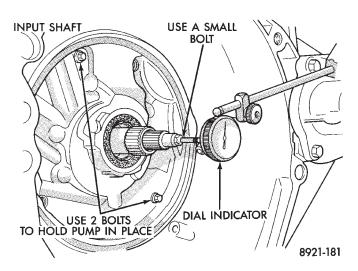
Measure Input Shaft End Play NO. 4 THRUST PLATE CHART
